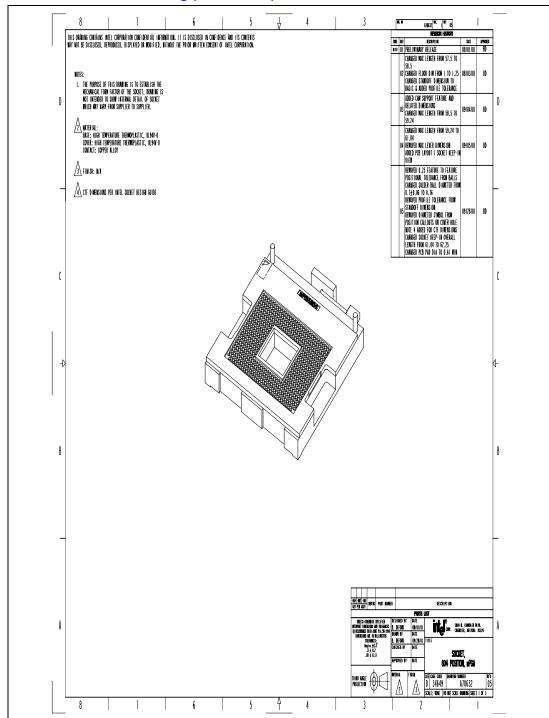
mPGA604 Socket Drawing (Sheet 2 of 3)
